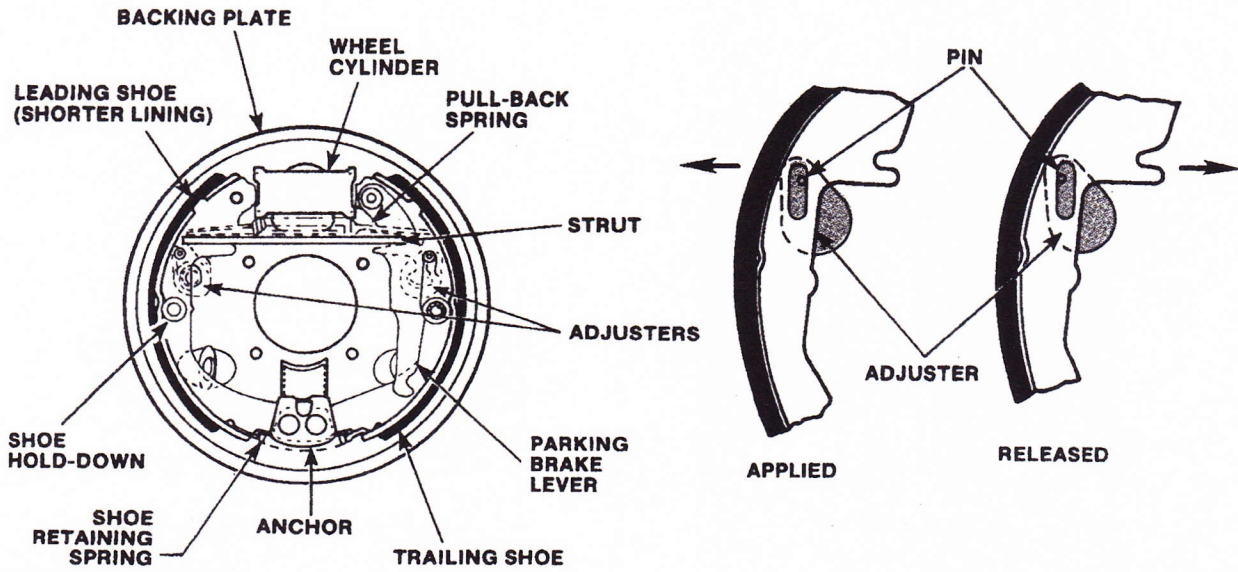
Nonservo drum brake with automatic cam adjusters.
